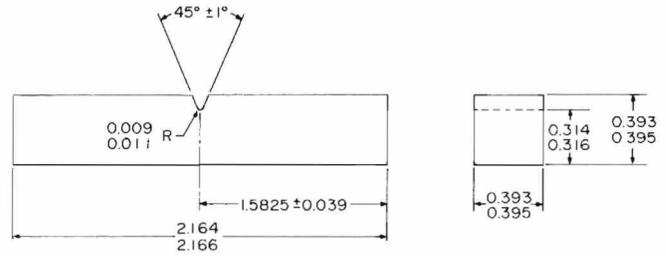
Charpy V-notch test specimen. (Measurements in inches.)
